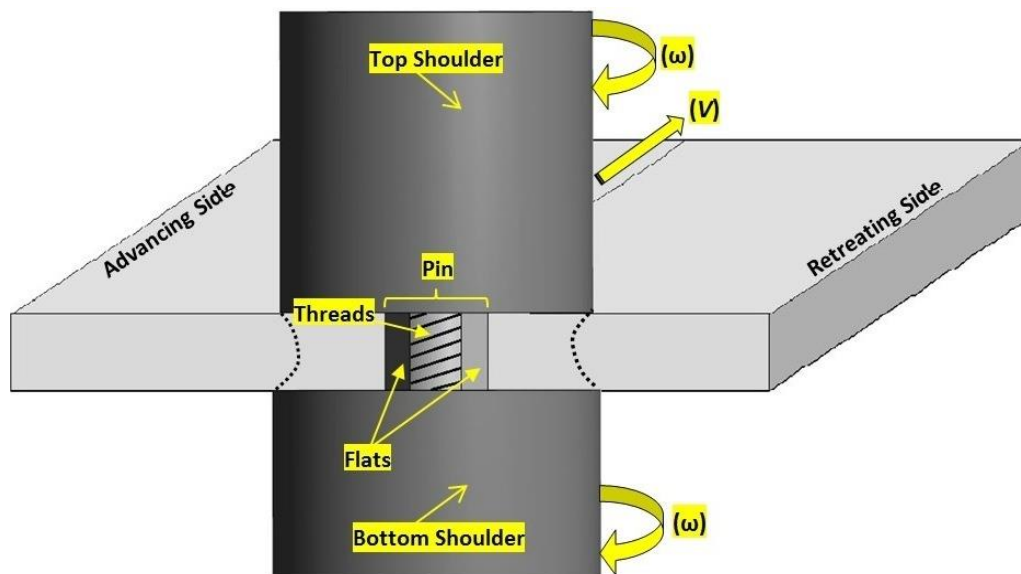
Schematic of the Bobbin Friction Stir Welding process; Bobbin-Tool in interaction with the workpiece as the substrate.
